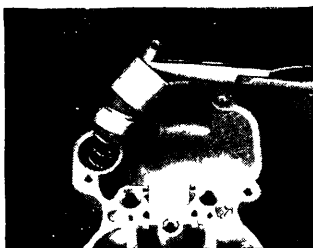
Install pump spring and plunger. Use loading tool to avoid damage to leather
